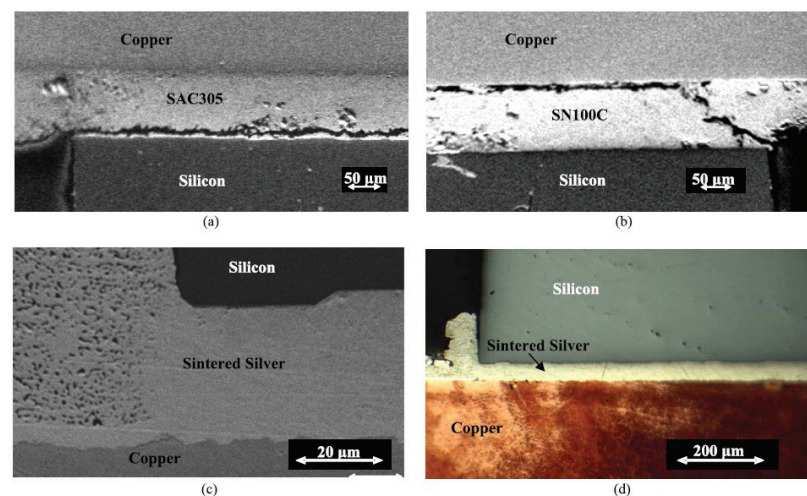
Cross sections of copper samples after 800 cycles for (a) cracked SAC305 soldered joints, (b) cracked SN100C soldered joints, and (c) intact sintered-silver joints, and (d) intact sintered-silver joints under low magnification.
